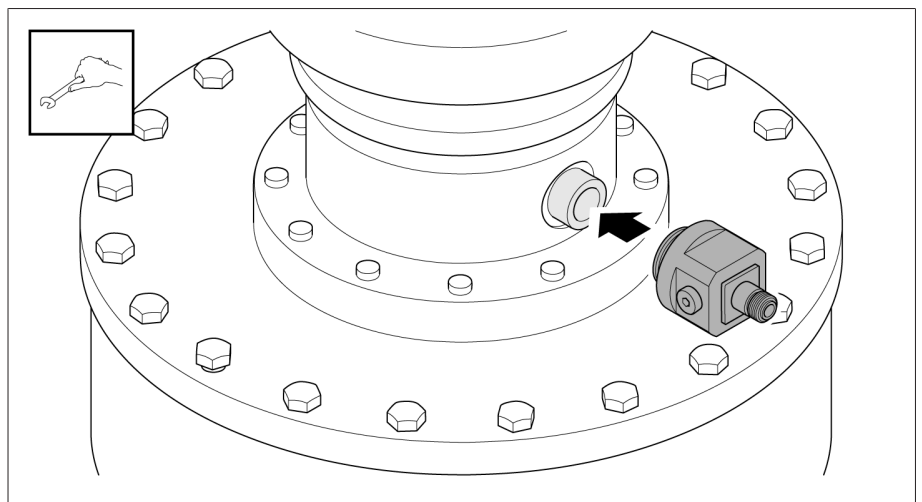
Installing the bushing adapter (example using bushing adapter A002)
